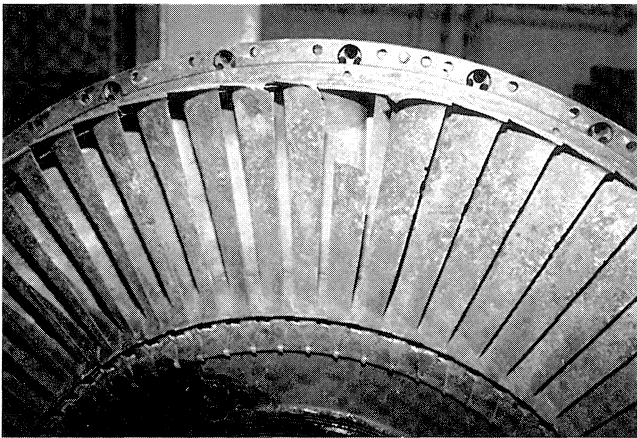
A Typical Combined Failure Mode Showing Both Tip Rub, Hot Corrosion, and a Fatigue Failure.
